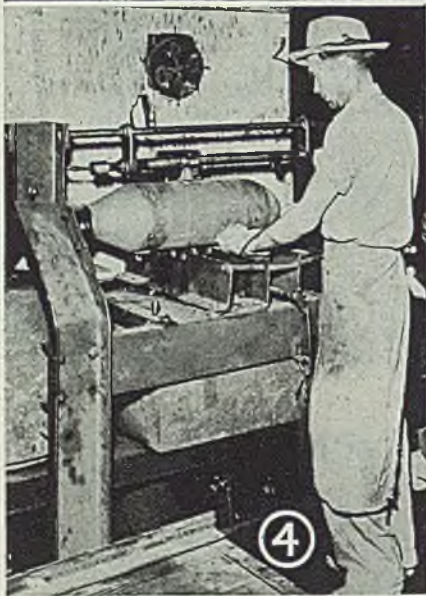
Hydraulic-operated lug testing machine checks strength of the welds fastening lugs to the bomb
